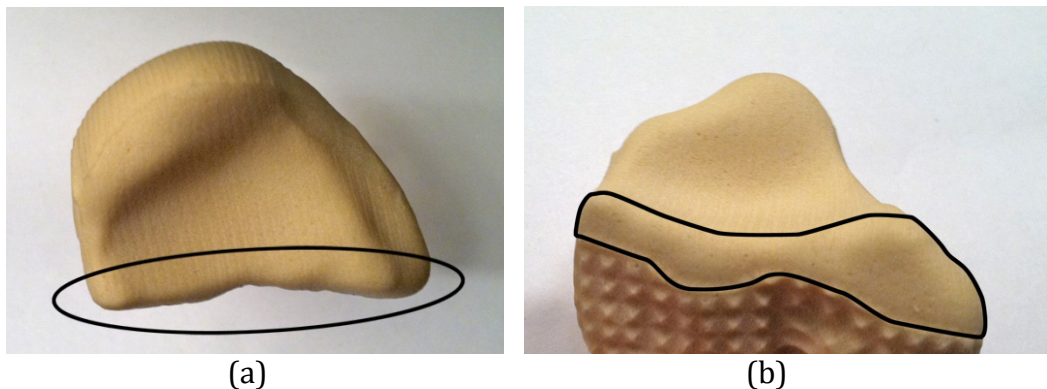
Implant machined using previous methods, without tool containment boundaries. Missing fracture surface is outlined in black.
